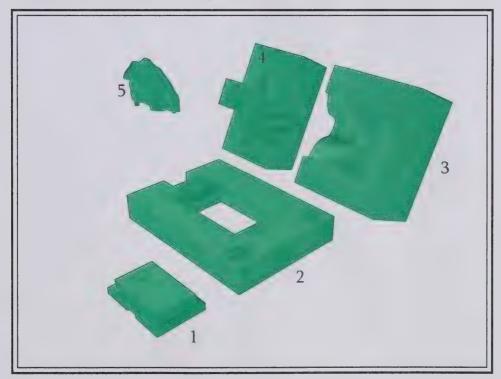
The Modified main mold, 3rd iteration. Bottom access hatch (1), base of the mold (2), first top of the mold (3), second top of mold with anchors for the nasal passage parts (4), nasal passage parts (5)
